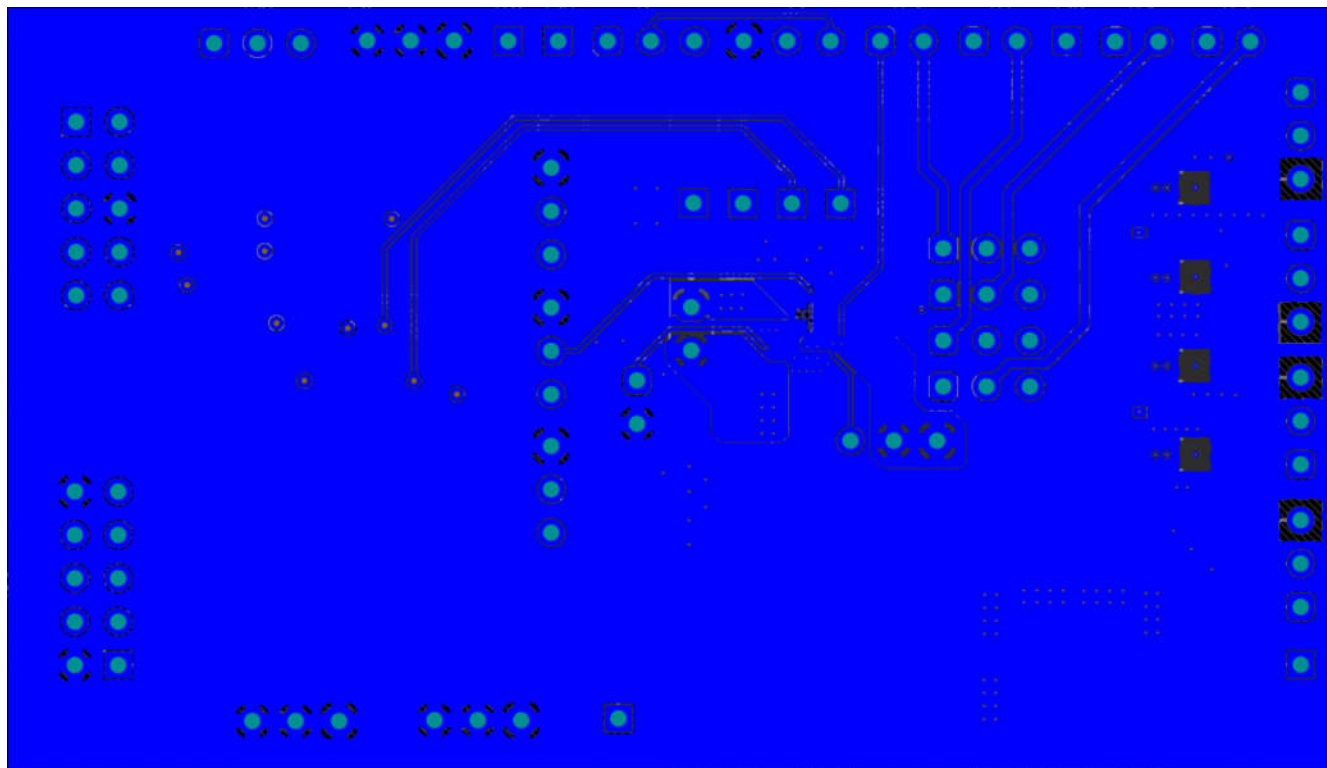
Bottom Assembly Layer (UNMIRRORED)
